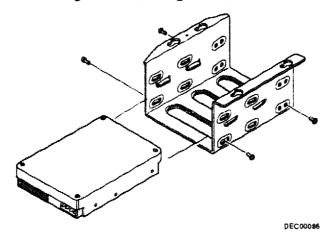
Installing the first Hard Disk Drive into the Mounting Tray
